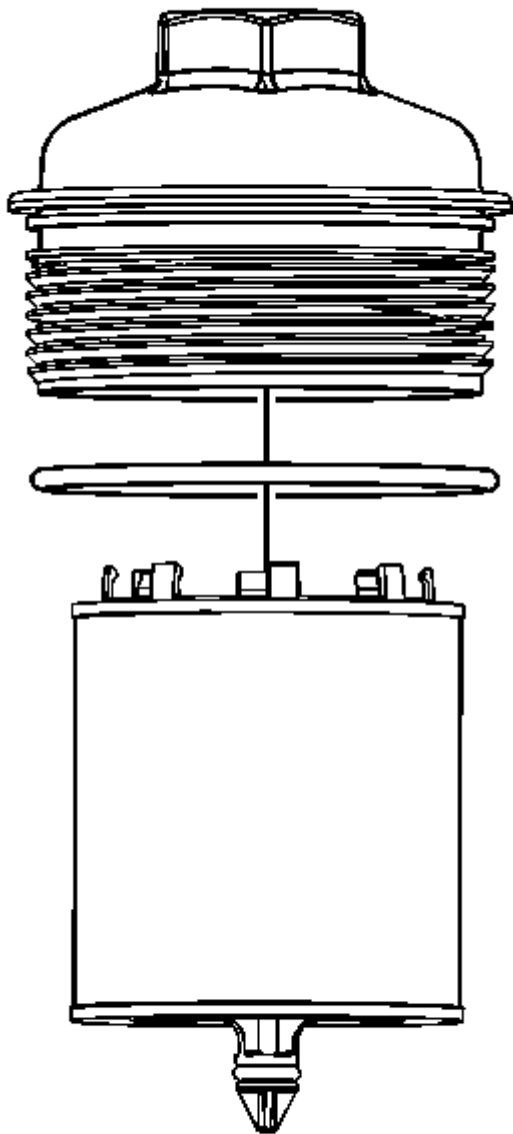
View Of Oil Filter & Cap O-Ring Seal
